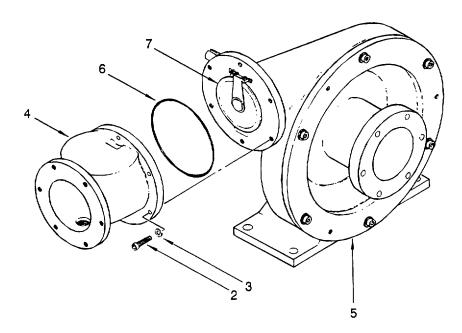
Fuel Transfer Pump Discharge Housing O-Ring Replacement
